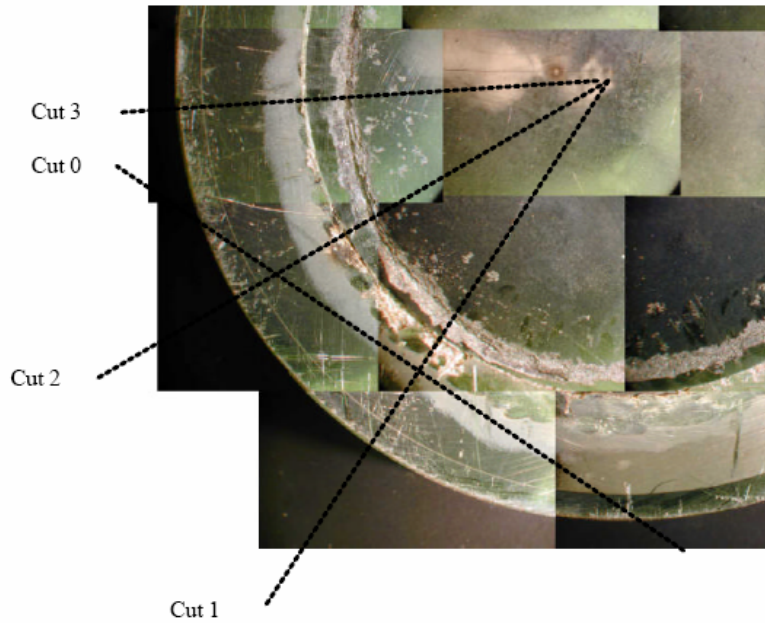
DETAIL OF BEAM EXIT SIDE TUNGSTEN
